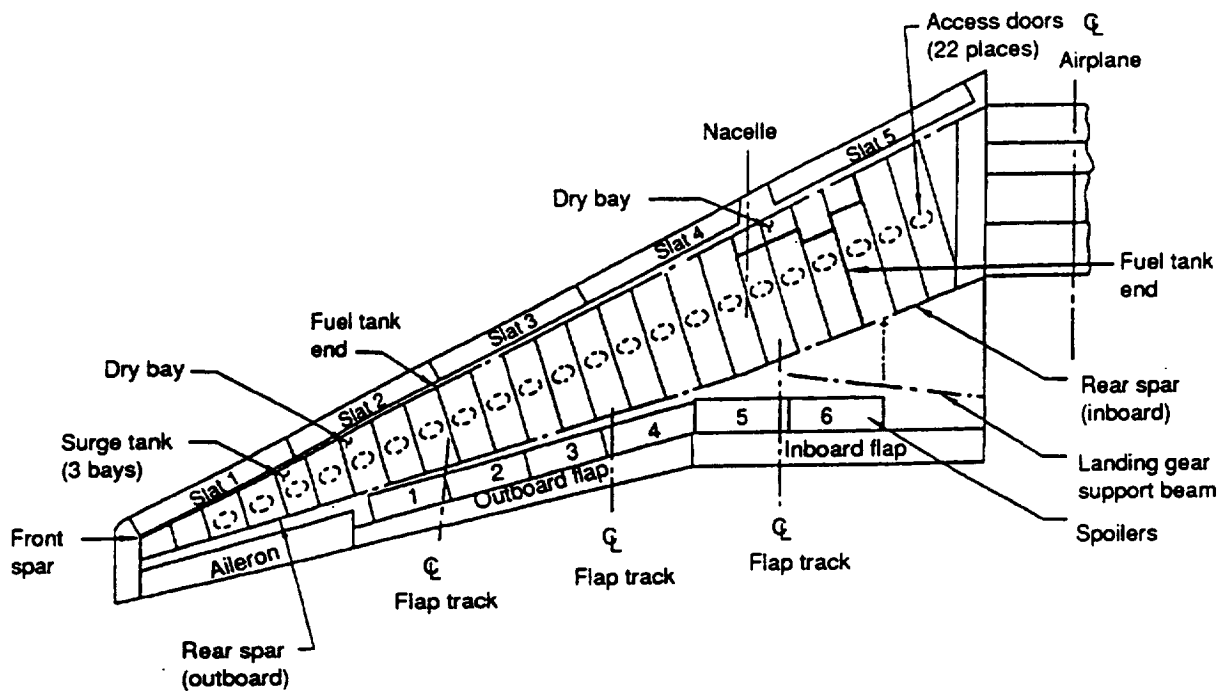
Boeing 757 Wing Structural Arrangement
